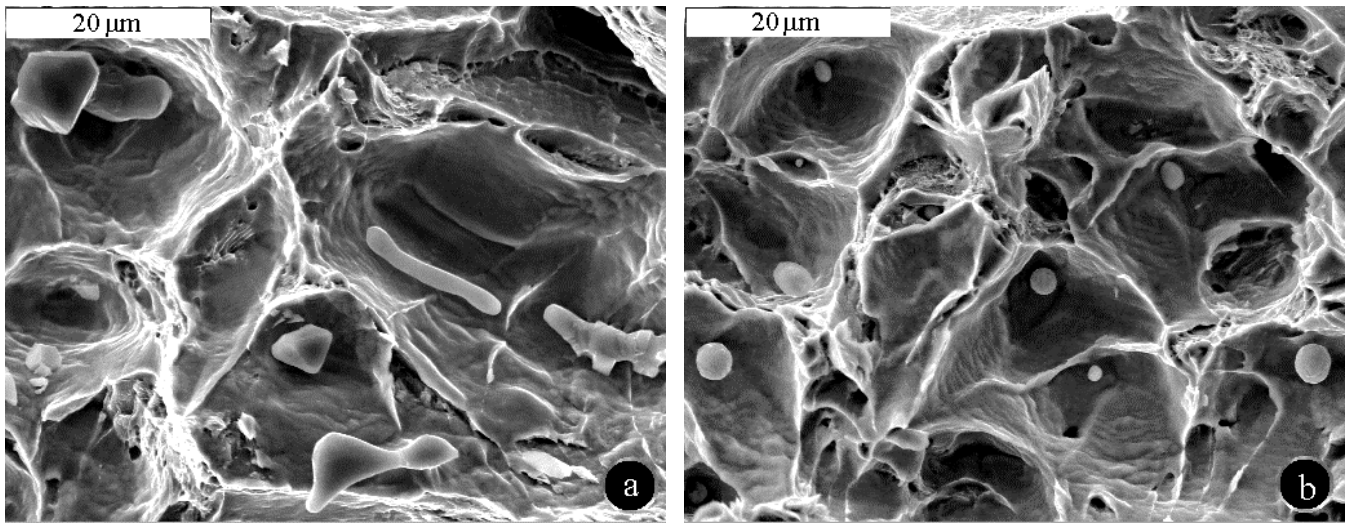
Morphology of impact strength fracture samples: a – unmodified, b – modified
